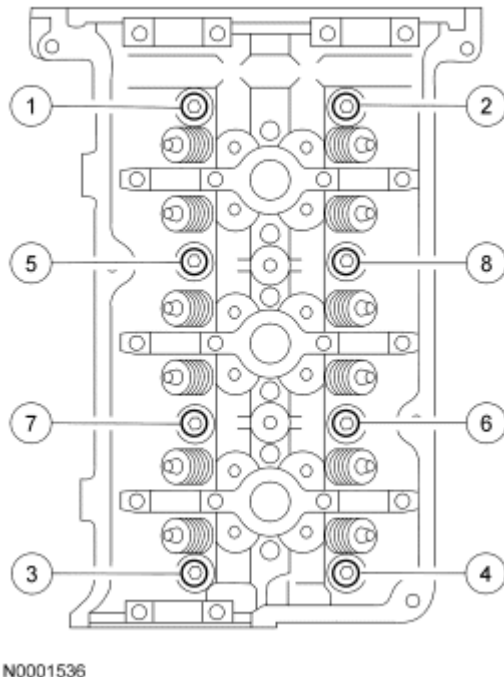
Identifying Loosening Sequence Of Cylinder Head Bolts
